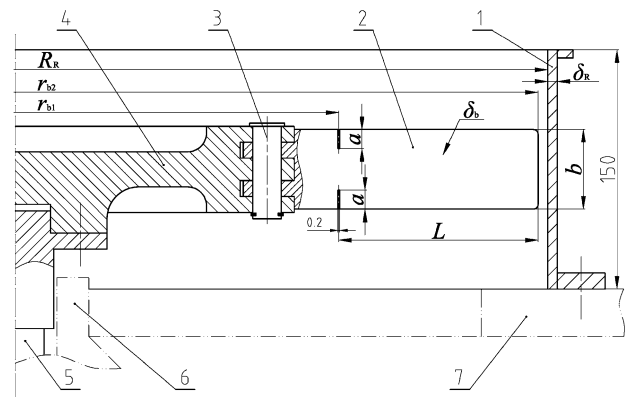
Sketch of the experimental set-up. (1) Containment ring, (2) blade, (3) connection pin, (4) disk, (5) flexible shaft, (6) protection bearing, (7) testing chamber floor.
